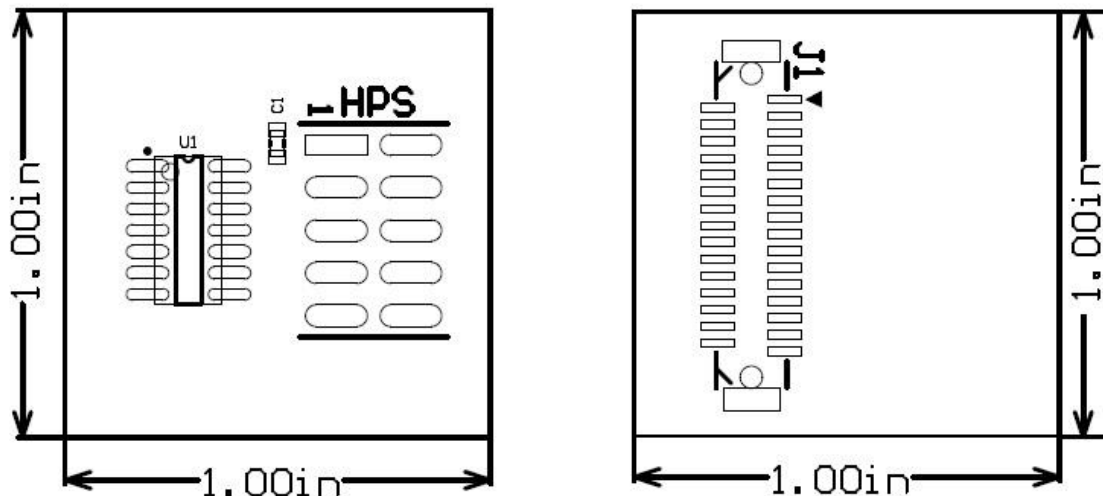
MitySOM-5CSx Debug Adapter Mechanical Outline
